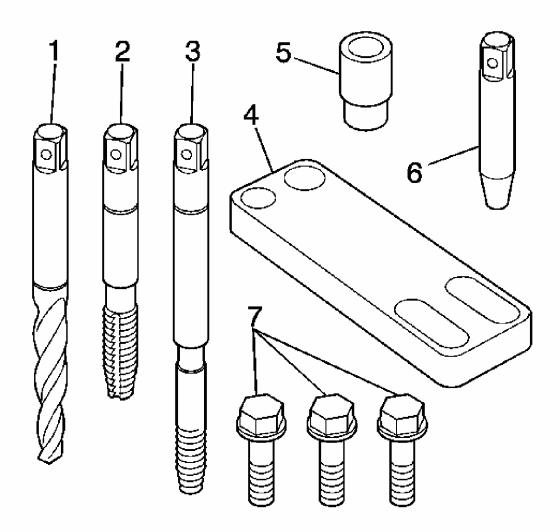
Identifying Crankshaft Main Bearing Bolt Hole Thread Repair Kit J 42385-2000
